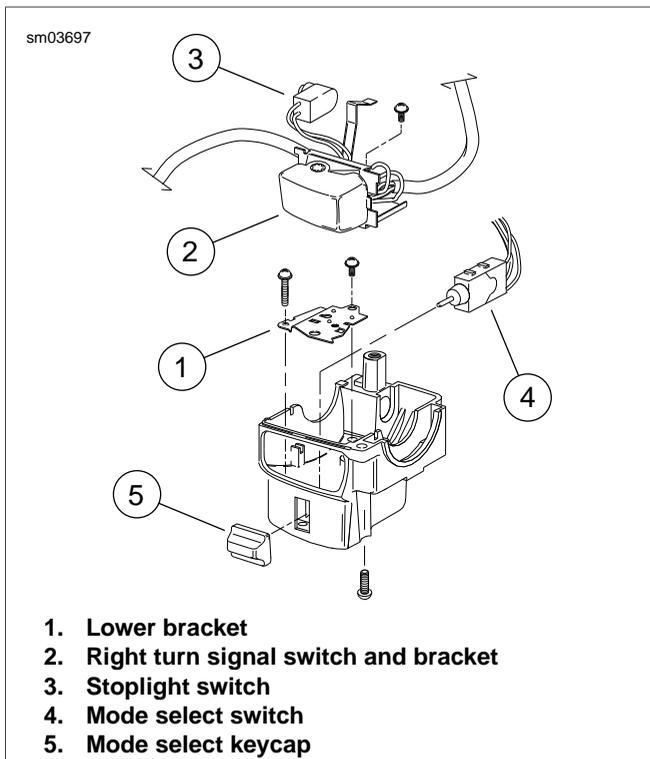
Lower Right Handlebar Switch Assembly (Classic)
